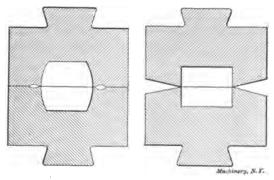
Stripping Die for Removing Fin Produced by Forging Process, and Work for which it is Used
